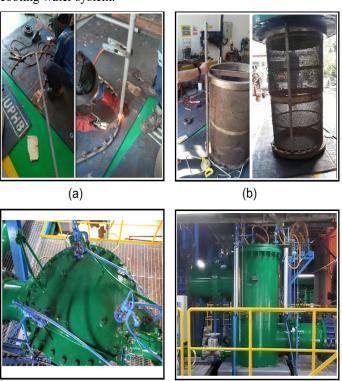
(a) Spray Nozzle Fabrication, (b) Spray Nozzle to Cover Strainer Assembly, (c) Cover to Body Strainer Assembly, (d) Final Assembly of Automatic-Cleaning Strainer
